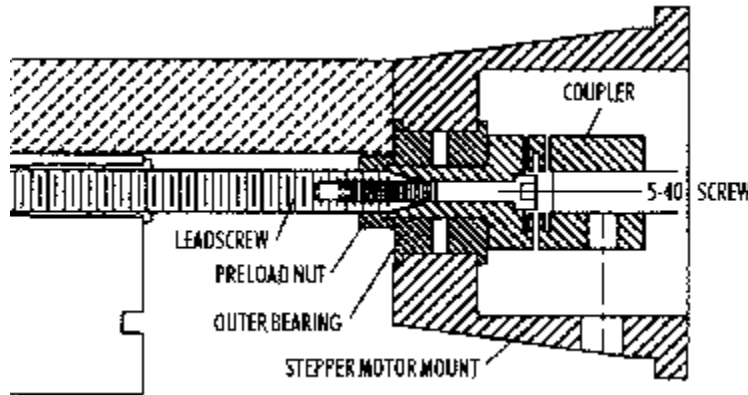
A cross-section of the stepper motor mount shows how the coupler is attached to the leadscrew.
